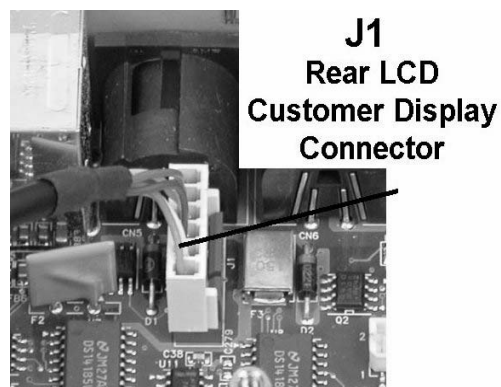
Attaching the Rear LCD Cable to the System Board
